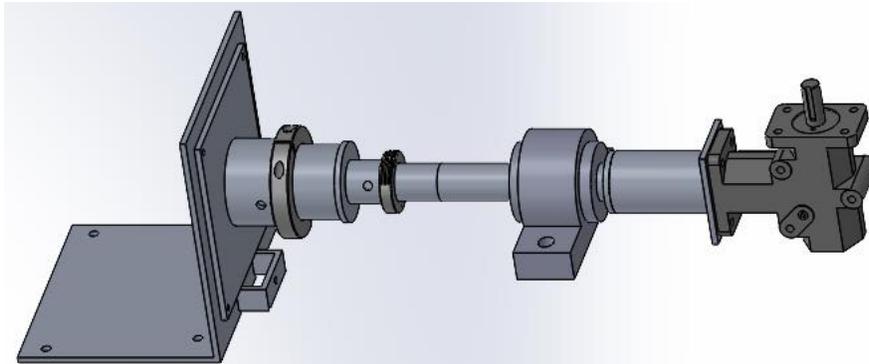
Shaft Housing Assembly, Top Shaft Housing Locked in Place.
